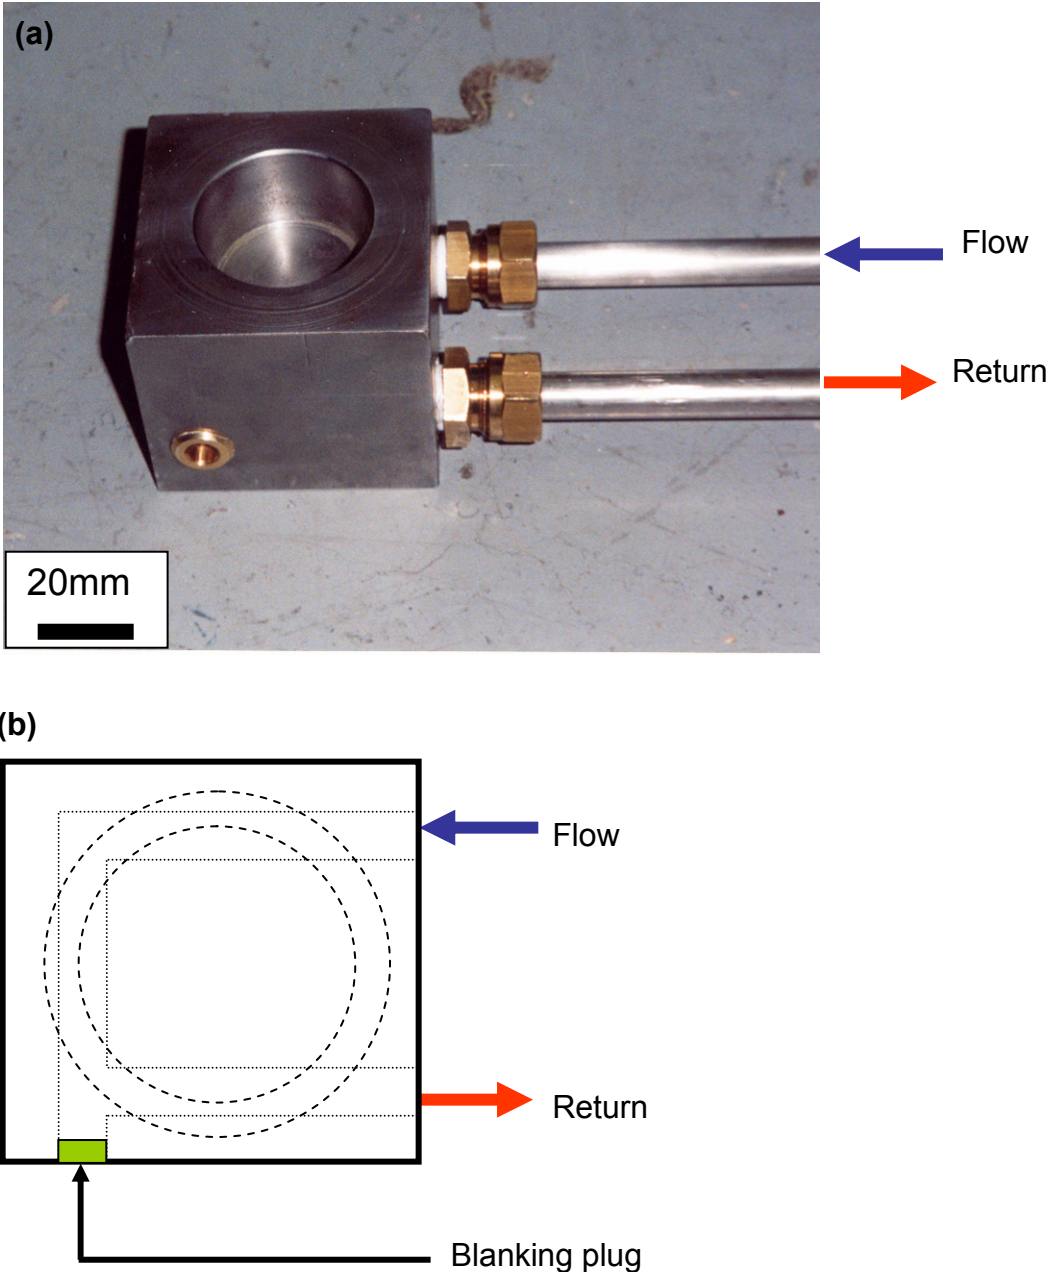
(a) Water cooled mould used in chill casting experiments (b) schematic of water channels through mould base
